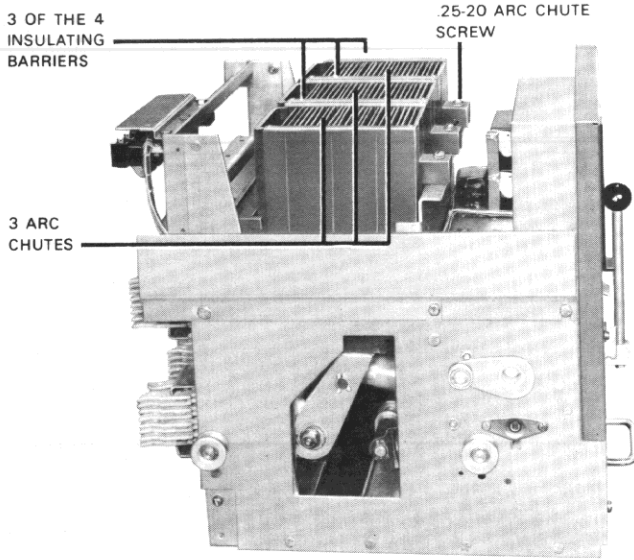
Breaker with Barrier Removed to Show Mounting of Arc Chutes
